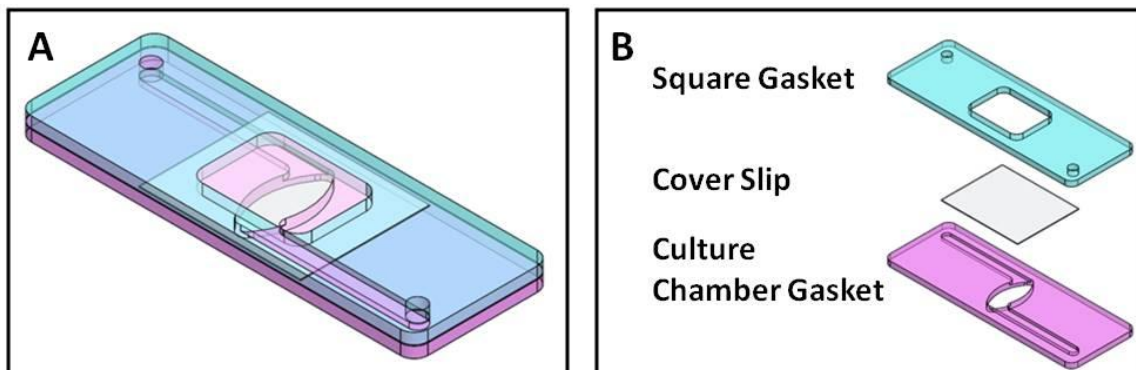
(A) Gasket assembly. (B) Exploded gasket assembly.
